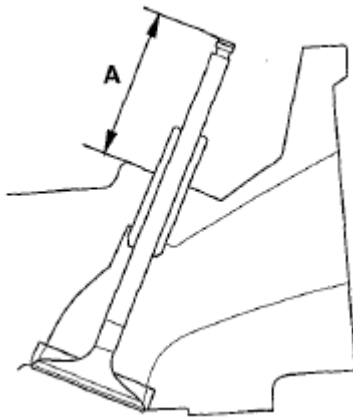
Identifying Air-Impact Valve Guide Driver Dimension
